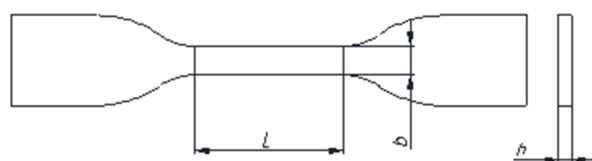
Shape and size of specimens: L - length of narrow section; b - width; h – thickness.
